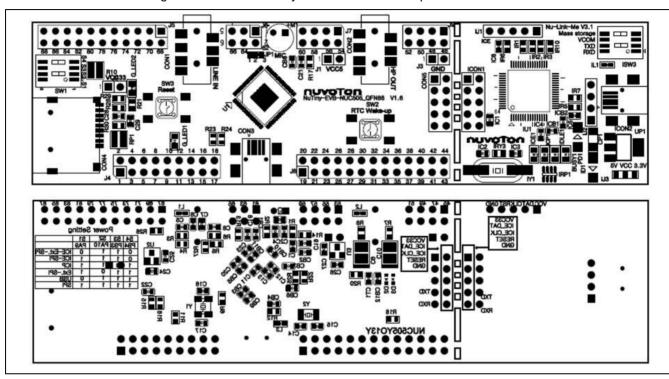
NuTiny-SDK-NUC505 PCB Placement
